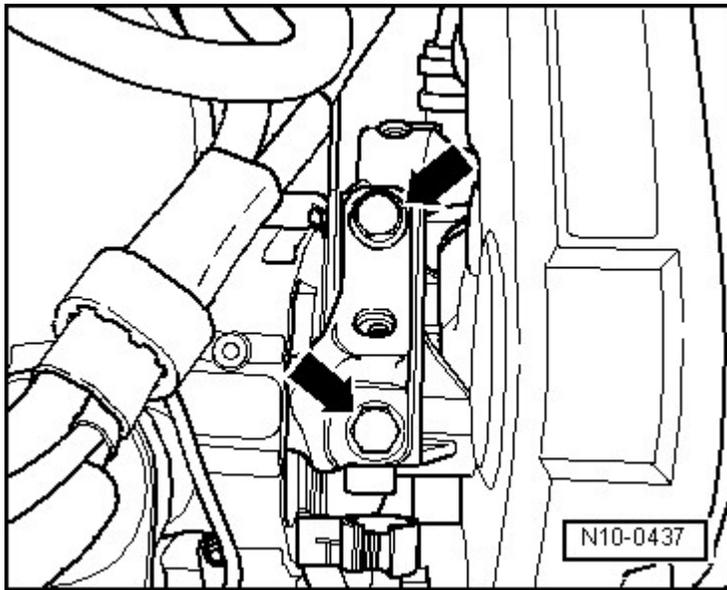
Identifying Mounting Bolts Of Subframe Mount/Engine Bracket
